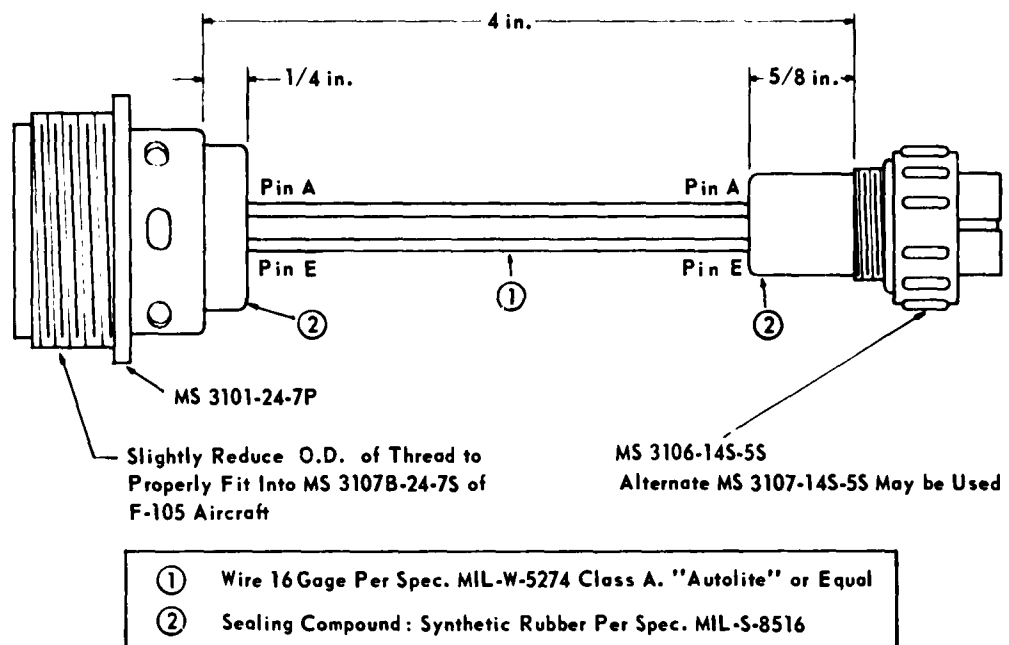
Engineering Drawing of Wiring Harness for Adapting LAU-10/A Rocket Launcher to F-105D Aircraft (Drawing No. 61B100007).
